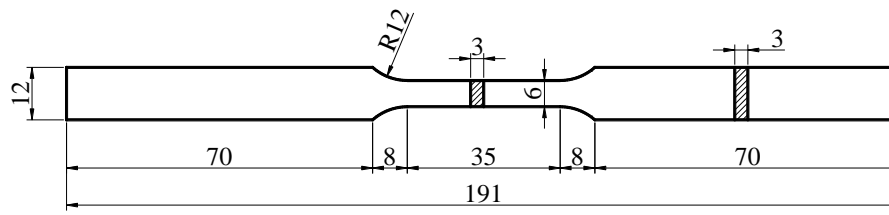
Dimensions of tensile coupon (Unit: mm).
